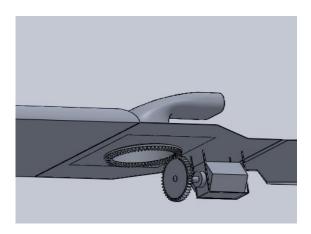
, The mechanism of the bow thruster drive with an electric motor (isometric view)
